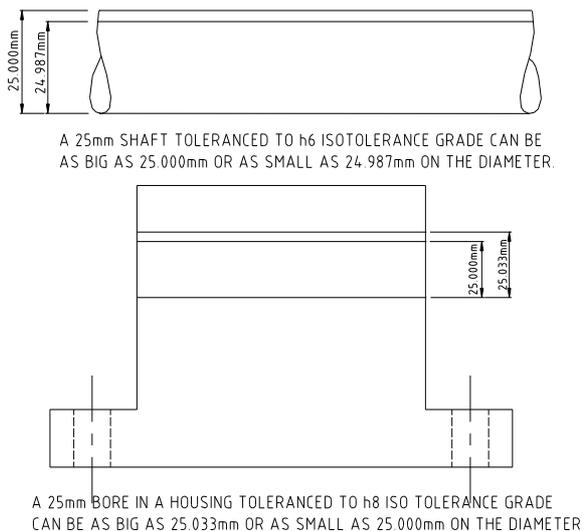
A dimensioned and toleranced shaft and hole.
